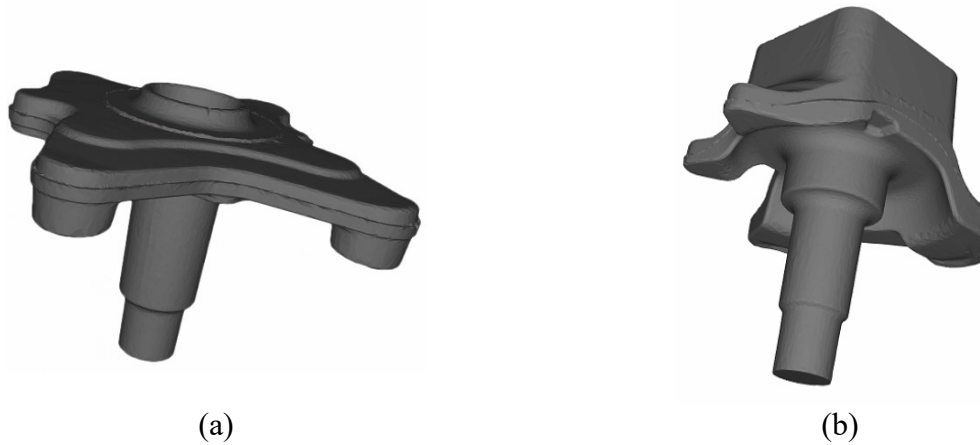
NSF industrial components (a) H spindle and (b) R spindle.
